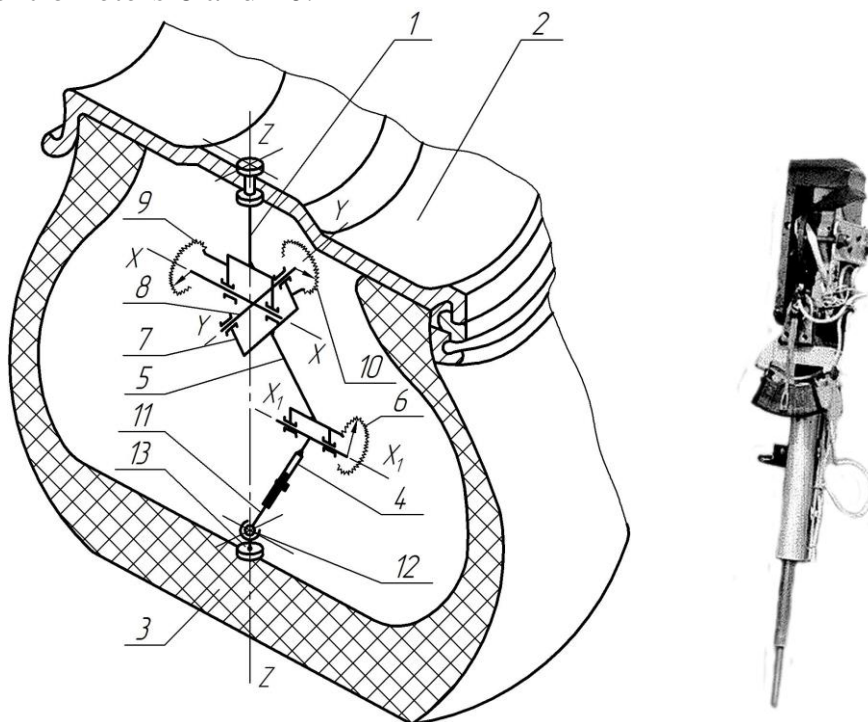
Design of measuring device: 1, 7 – forks; 2 – wheel rim; 3 – tire; 4, 5 – guide links; 6, 9, 10 – potentiometers; 8 – crosspiece; 11 – rod; 12 – hinge; 13 – vacuum chamber
